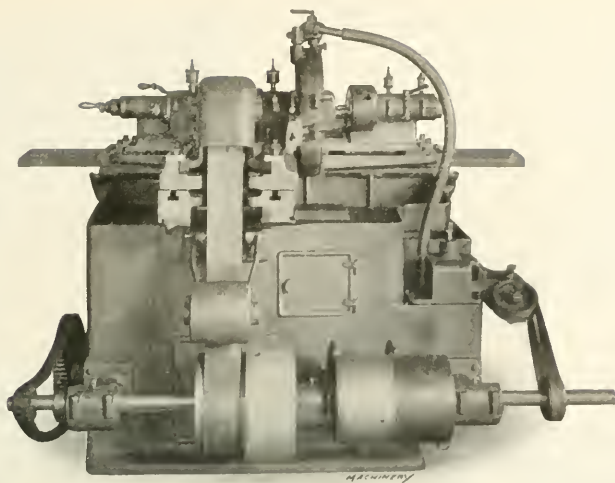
Rear View of Modern 8 by 18-inch Self-contained Grinder, showing Arrangement of Main Driving Shaft
